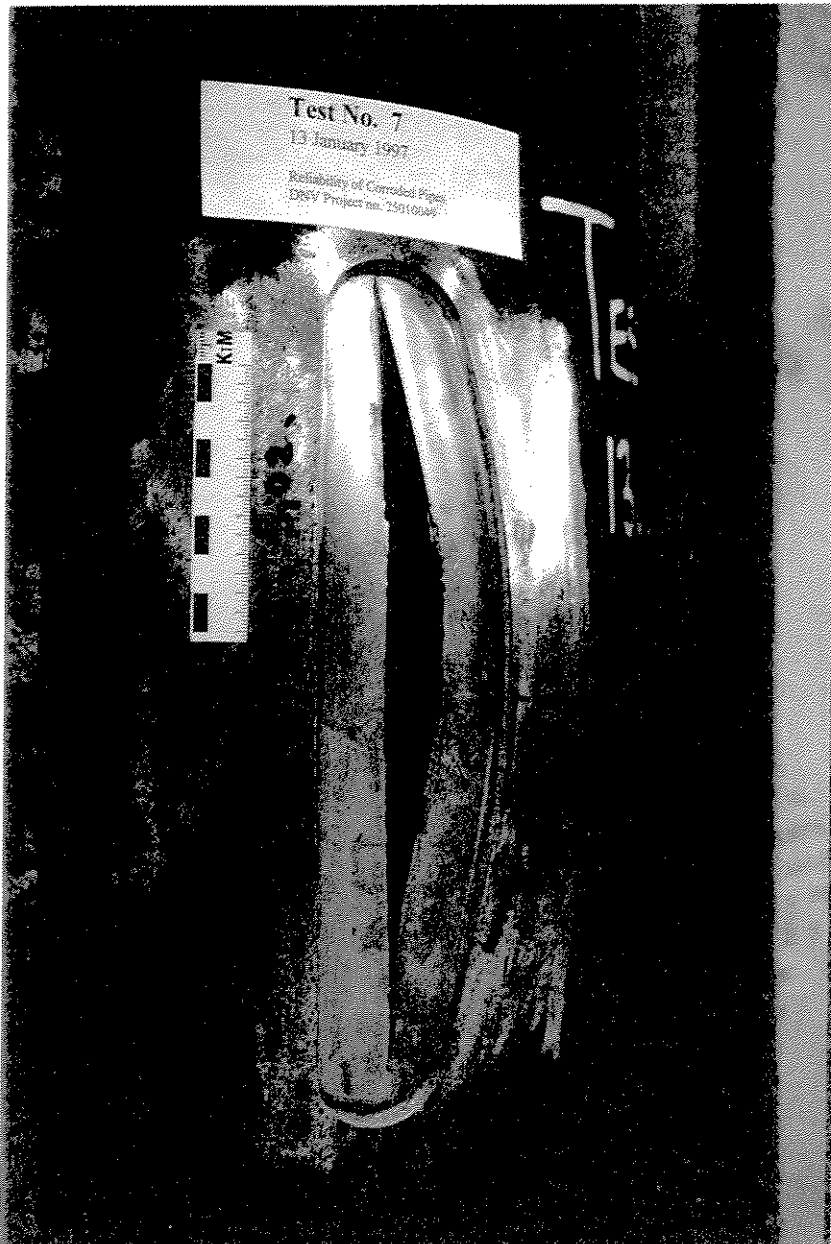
Picture of the test specimen no. 7 after the burst test
